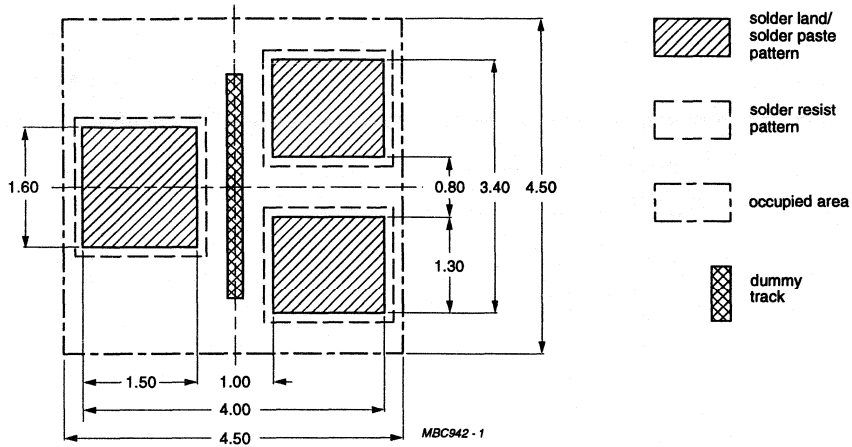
Reflow soldering footprint for SOT23; typical dimensions.
